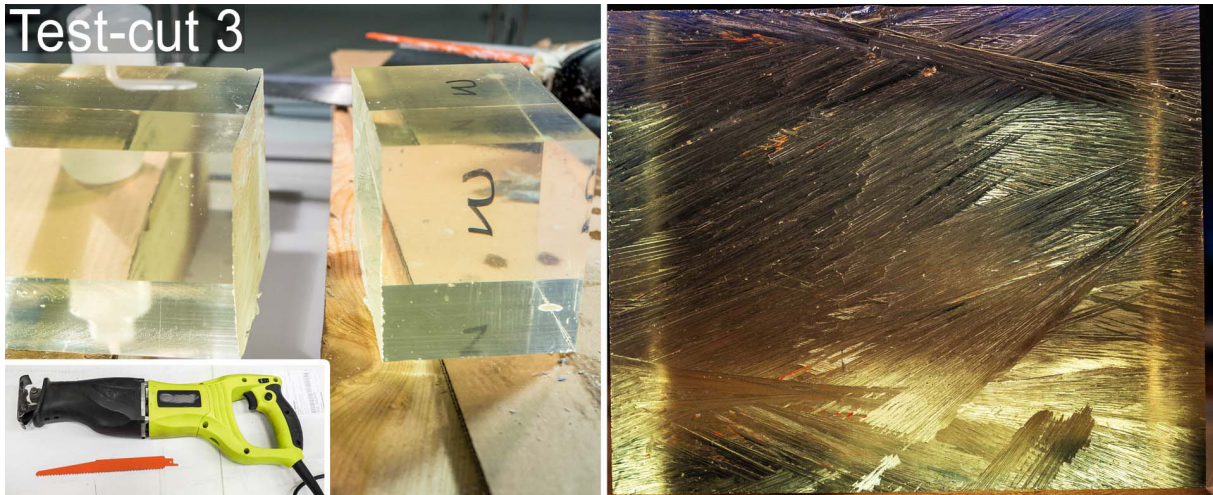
Scintillator Test-cut 3, performed using a 6 TPI bi-metal blade on reciprocating saw. (Left panel) the cut-off piece and (right panel) a close-up of the surface finish for Test-cut 3 is shown. An image of the saw used to perform this cut is included in the bottom left panel corner.
